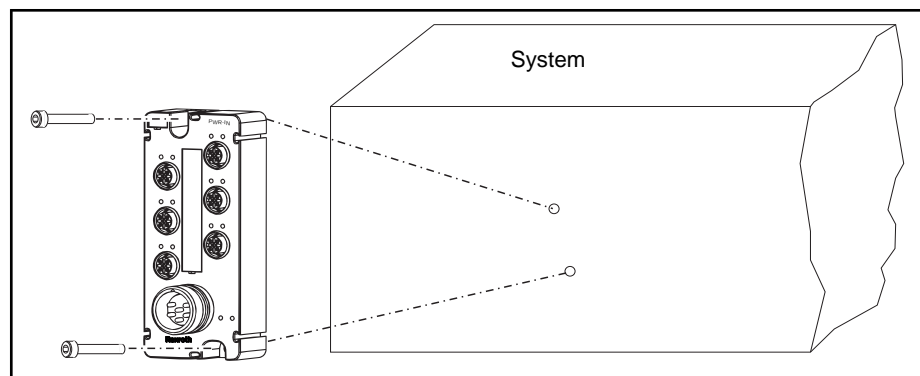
Mount the module at a grounded frame of the system or another earth connection point
